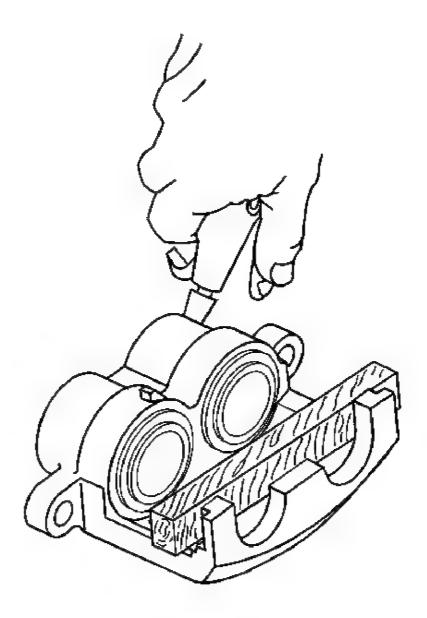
Applying Air To Brake Caliper Courtesy of GENERAL MOTORS CORP.
